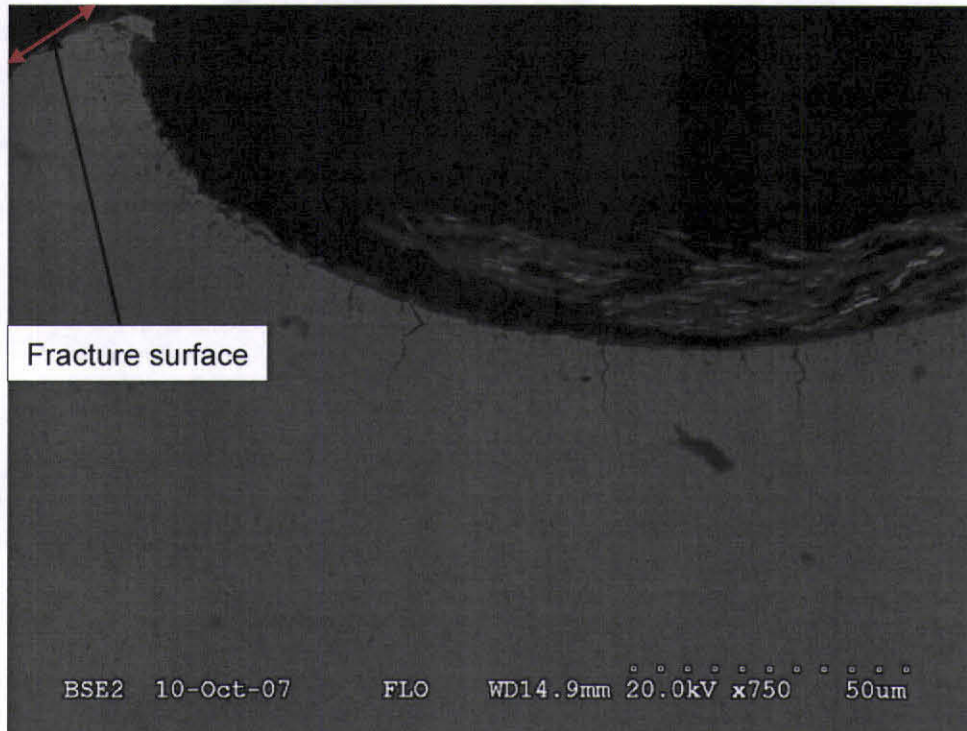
Picture of cross section through thread root close to the bolt fracture. Area also shown in Figure 6.
